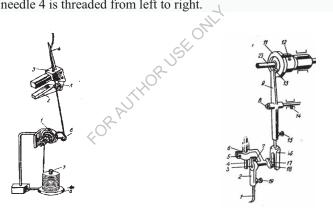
Bottom thread stitching on GN1-1D sewing machine
